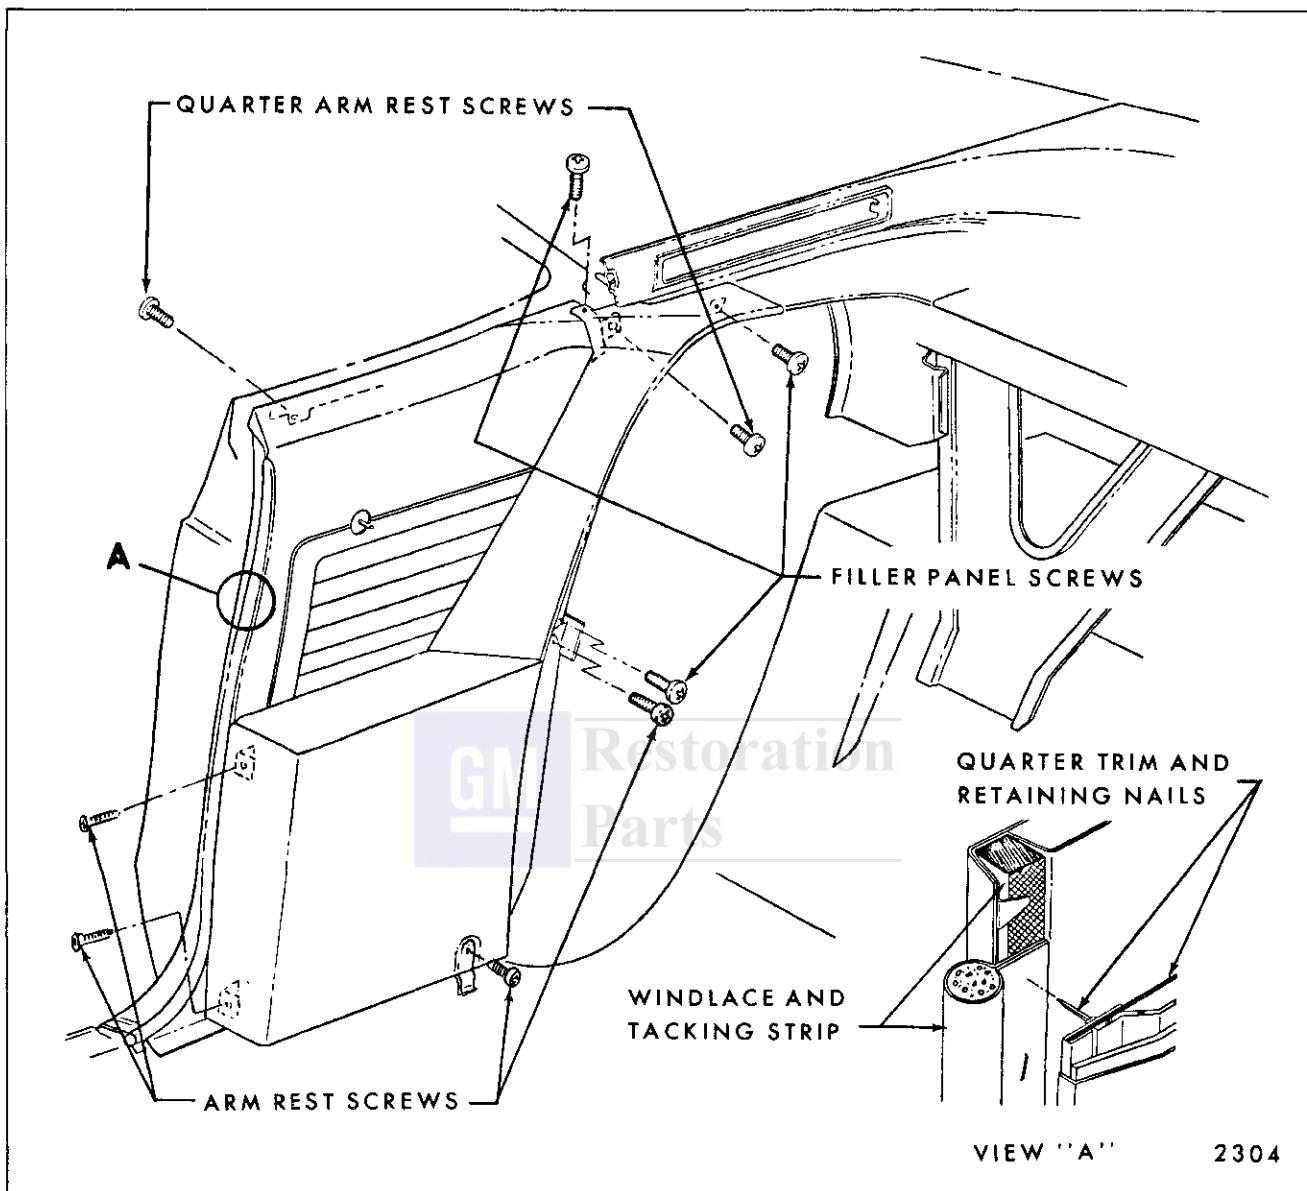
Rear Quarter Trim Assembly - "39487" Style
